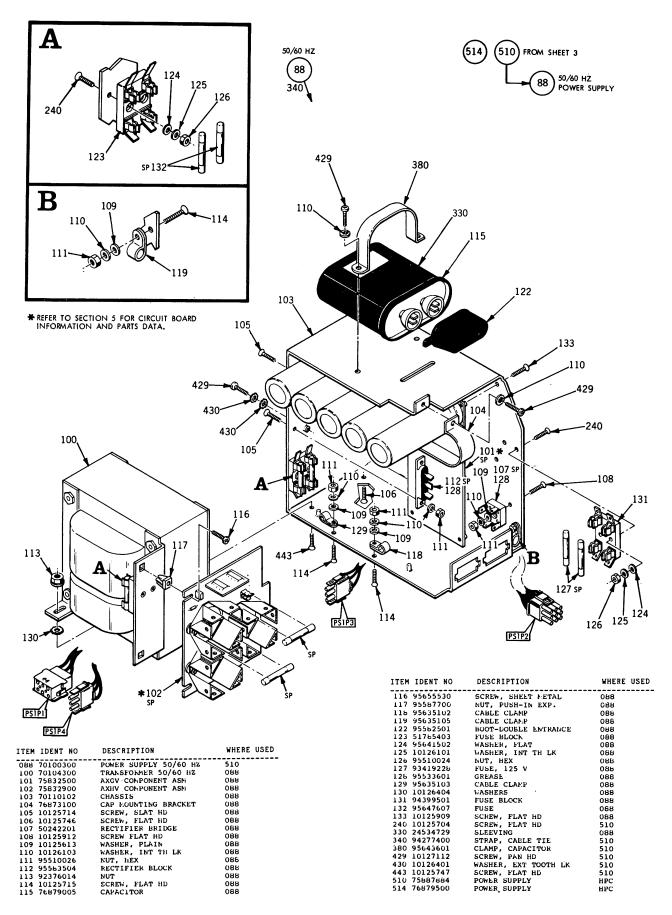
POWER SUPPLY ASSEMBLY
